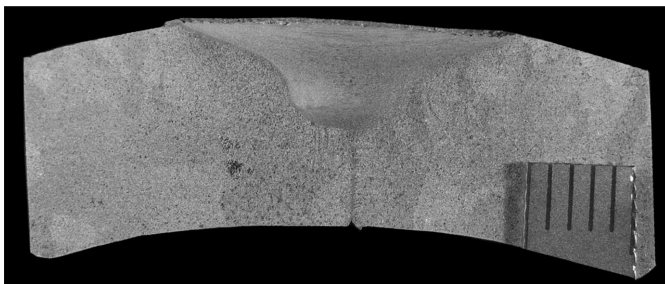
FSW weld structure. Welding using a cone tool. Welding parameters: no. 4 of Table 4
